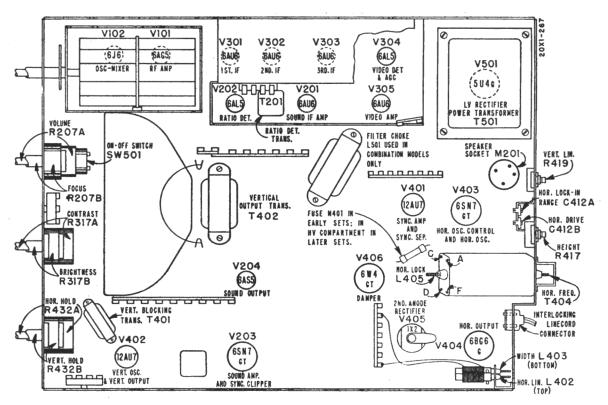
Bottom View of Television Chassis Showing Tube Locations.
